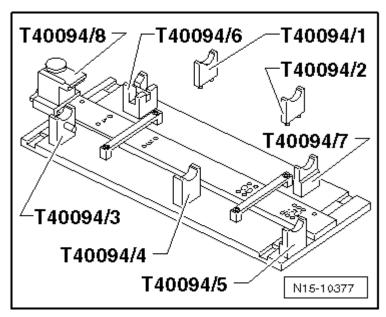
Identifying Mounts T40094/1 To T40094/8
